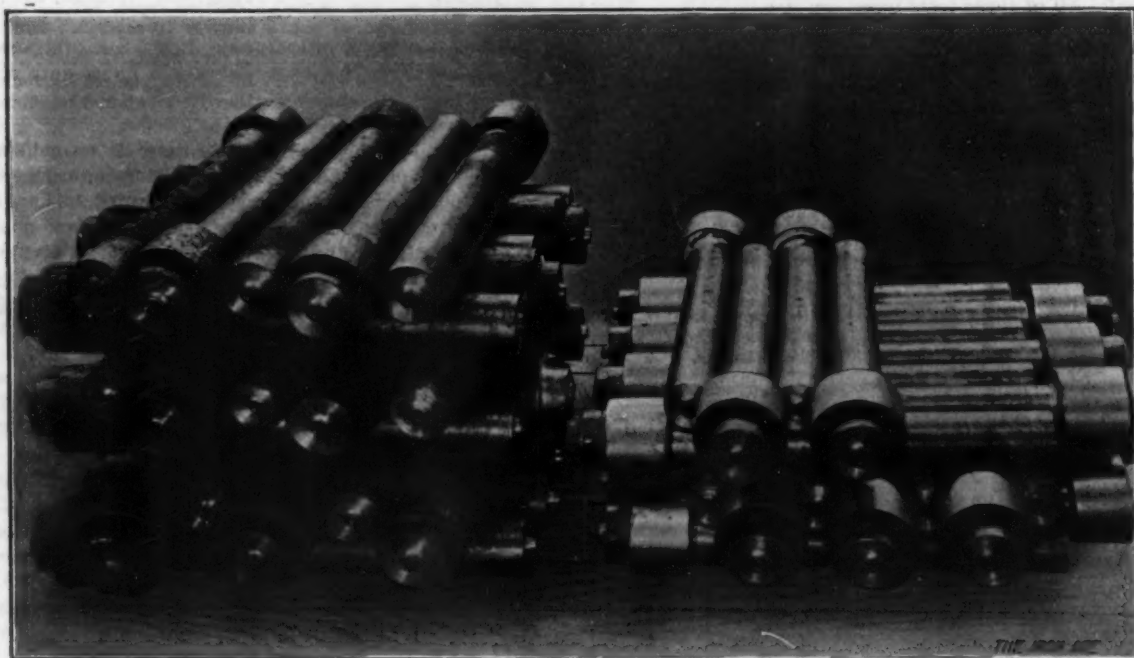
Back Gear Sleeves Rough Turned by the Tools Tested.
